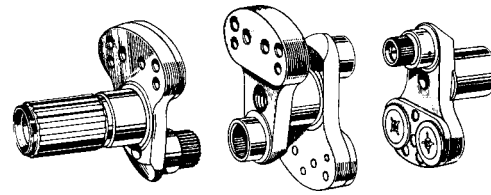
Two-row Radial Crankshaft (Pratt & Whitney)
